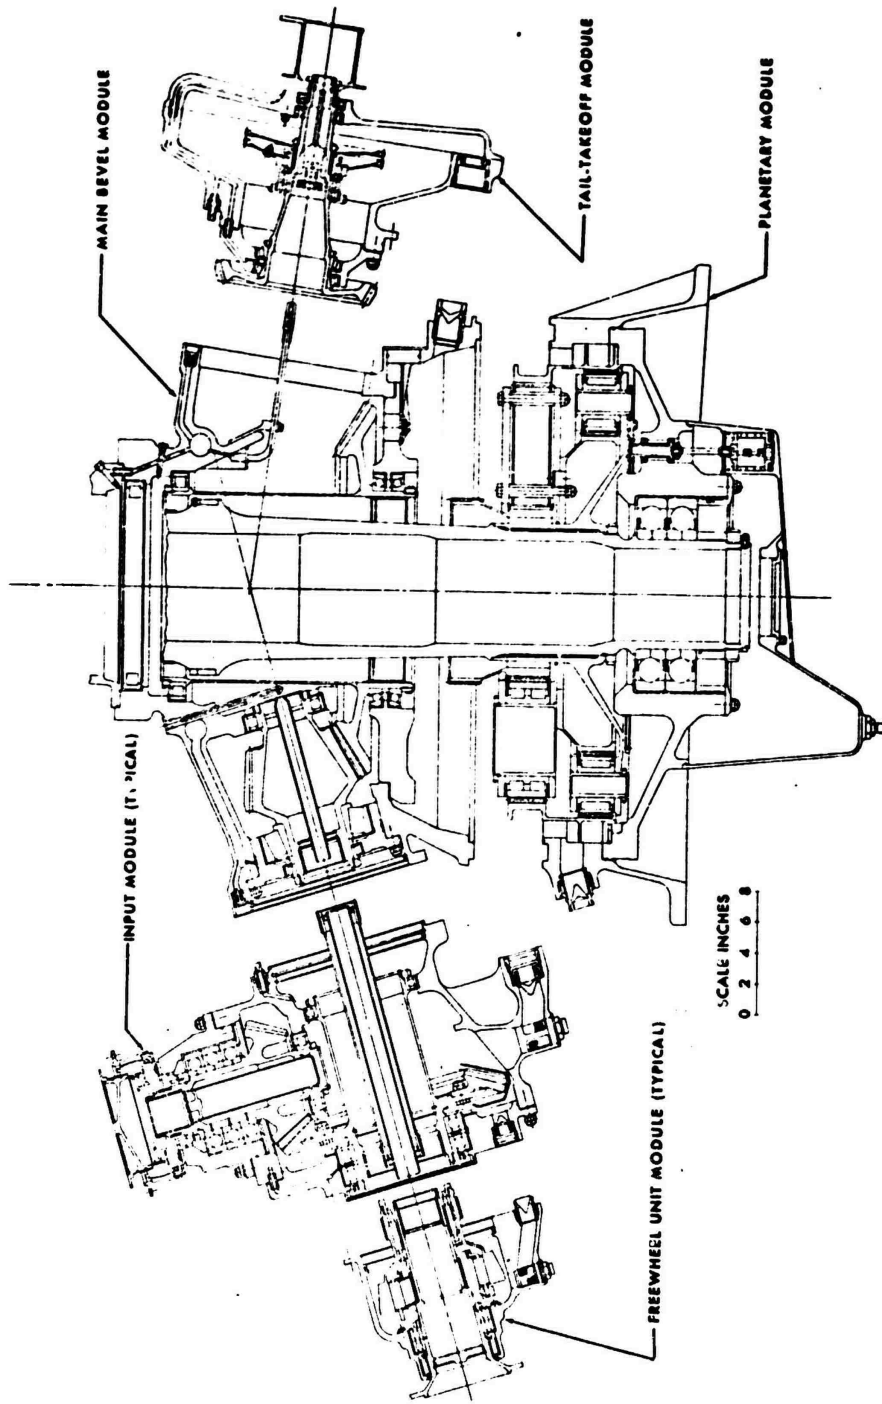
Exploded Cross Section of CH-54B Main Transmission, Seven-Module Configuration.
